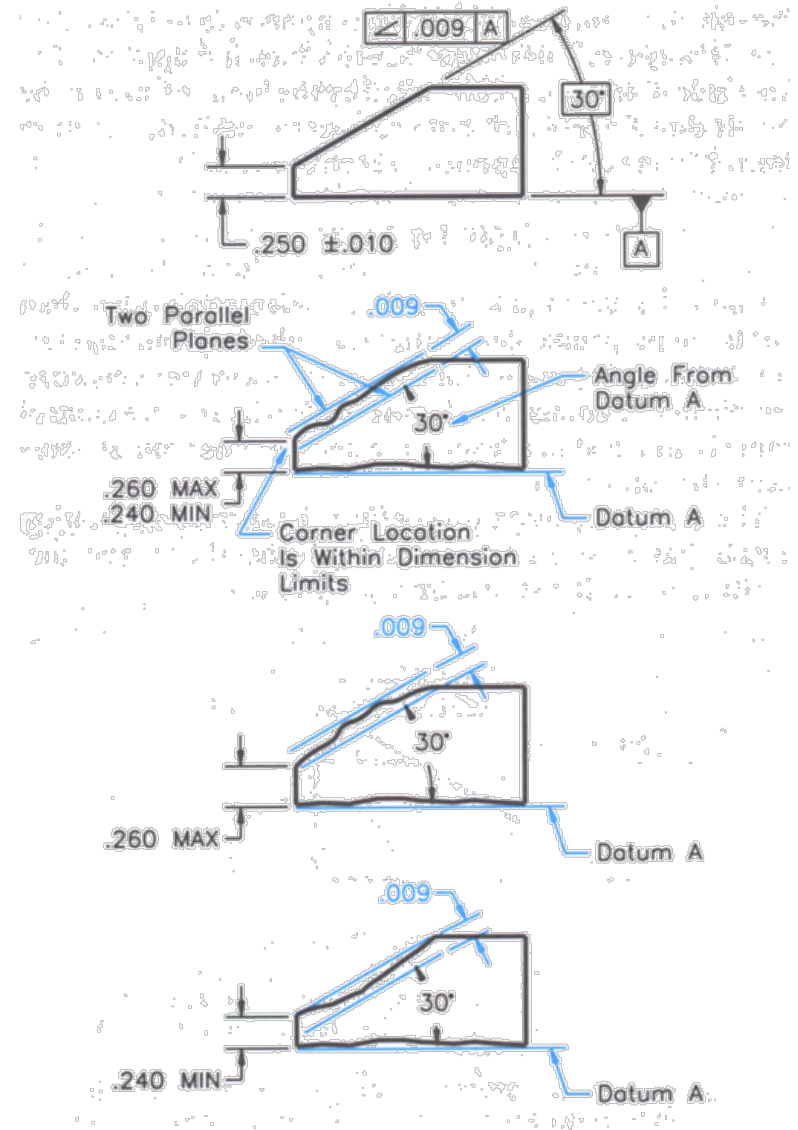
The angle dimension defining the surface orientation must be basic when an angularity tolerance is applied.
